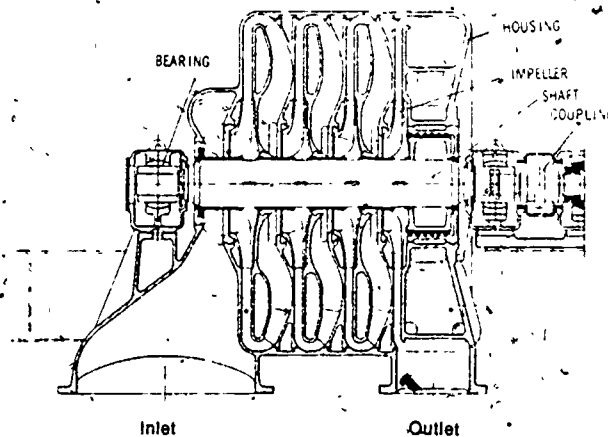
Cutaway View of a Centrifugal Air Compressor.
